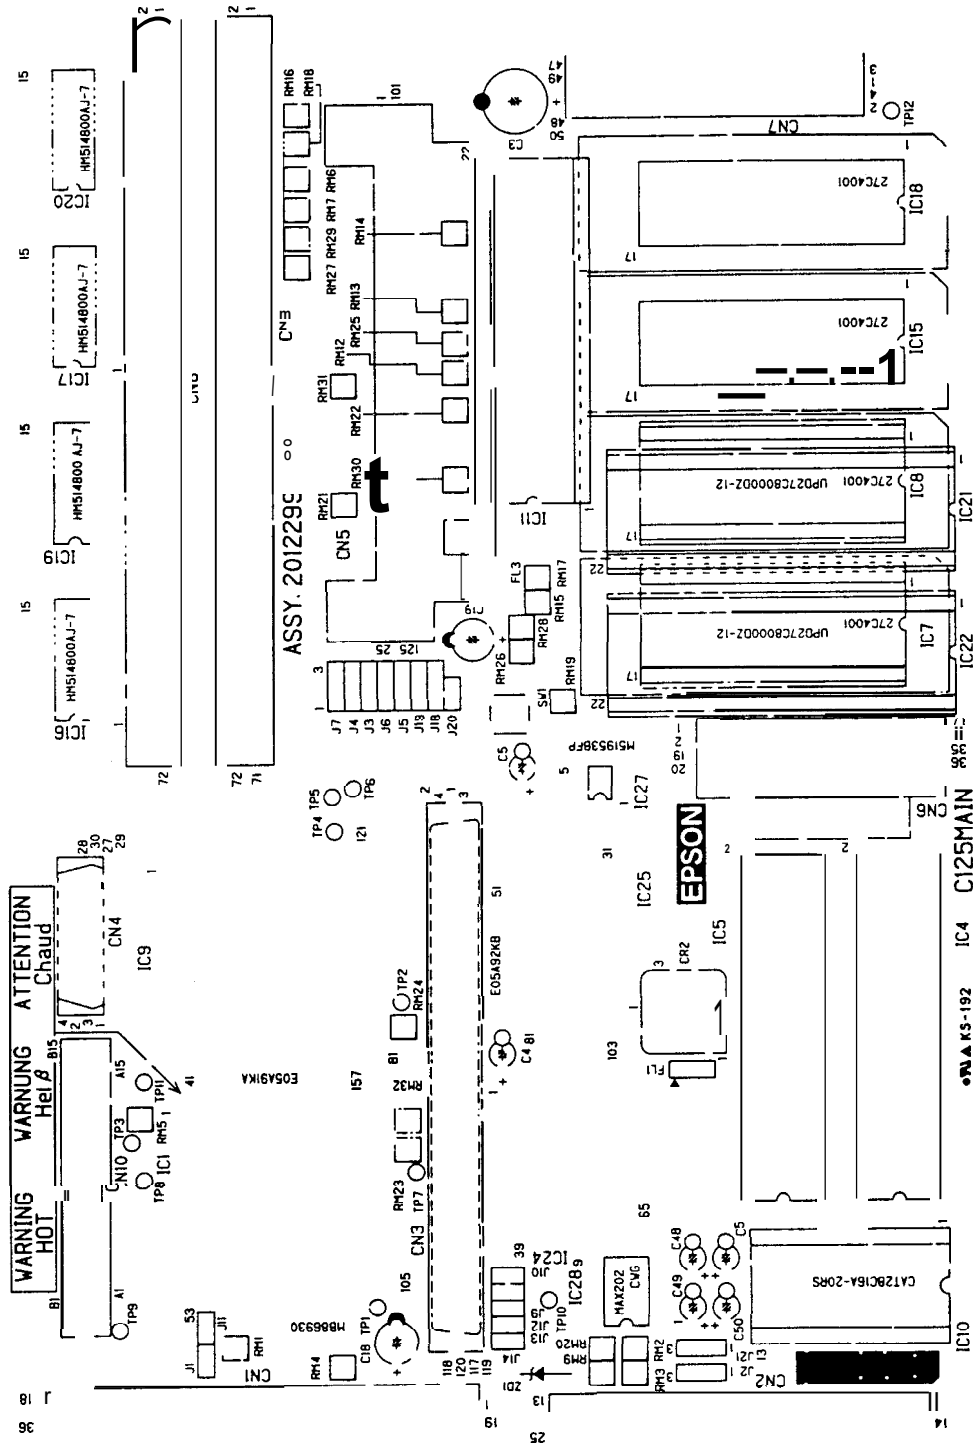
C125 MAIN Board Component Layout (Front Side)
